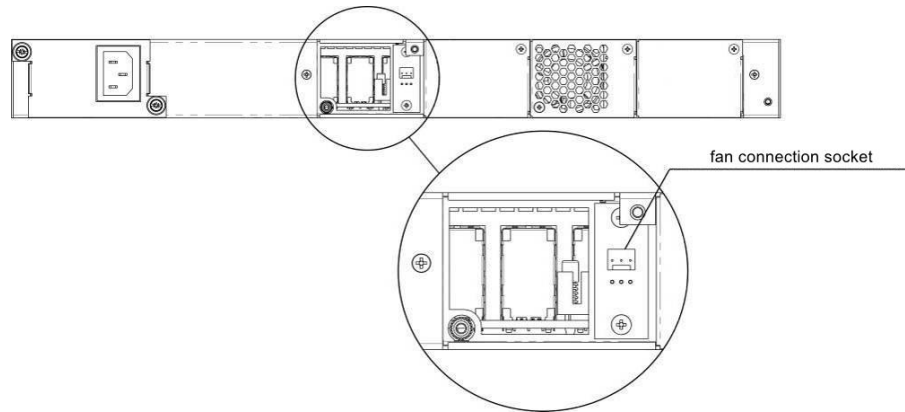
Fan connection socket in SBC-1000 based on SMG-1016M
